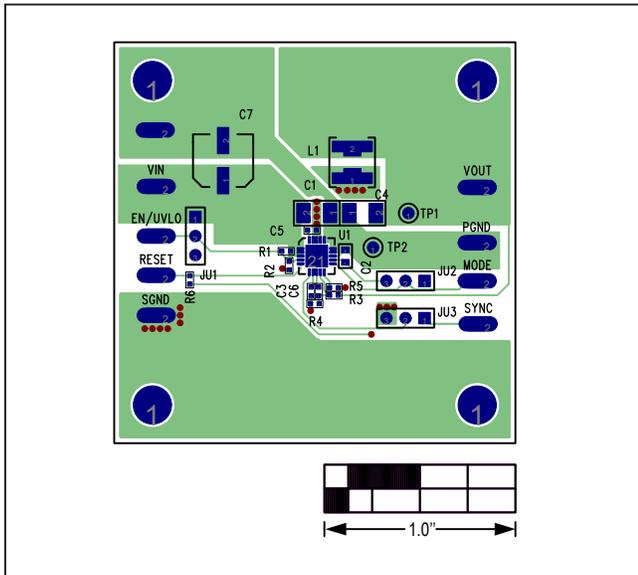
MAX17545 5V Output EV Kit Component Side PCB layout
